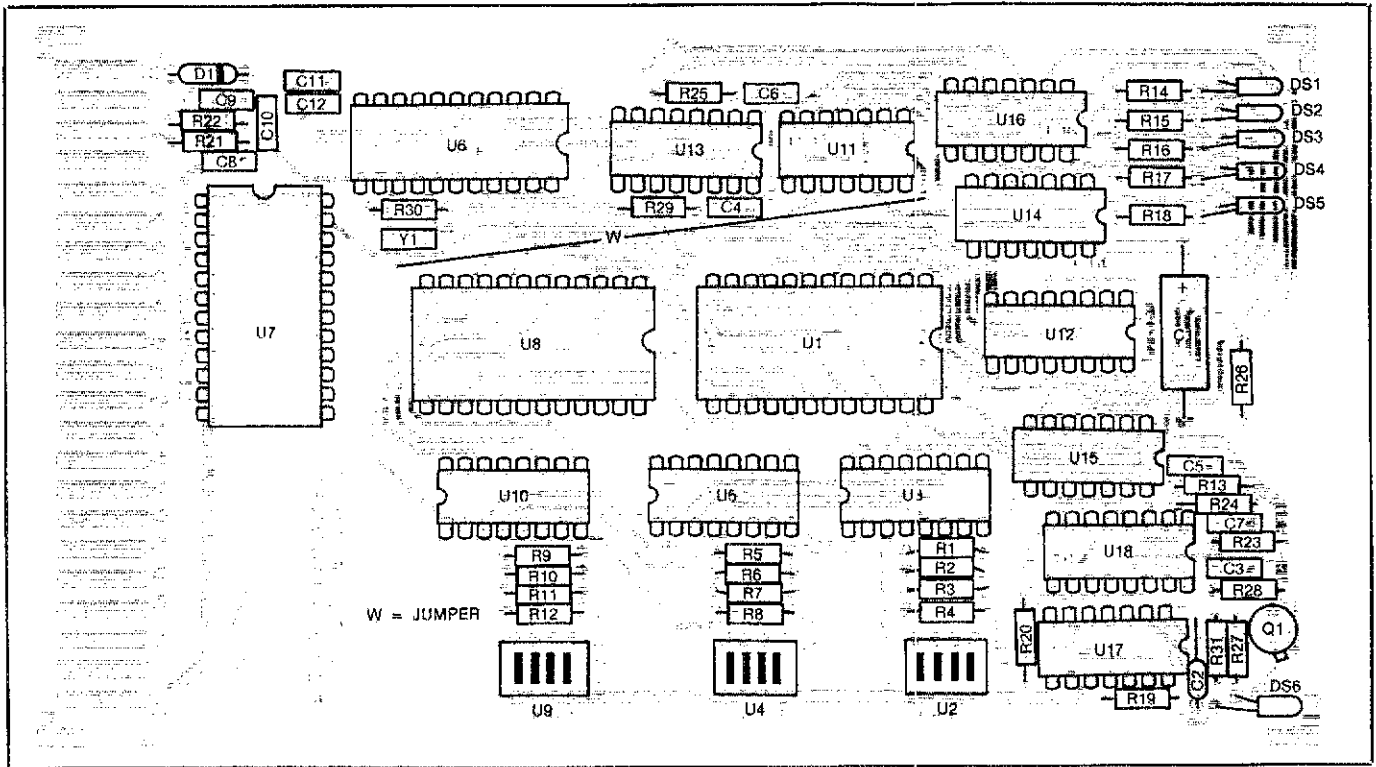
Parts-placement guide for the DTMF decoder board. Parts are placed on the top (lettered) side of the board. The shaded areas represent an X-ray view of the copper pattern. See Hints and Kinks, this issue for the etching-board patterns.
